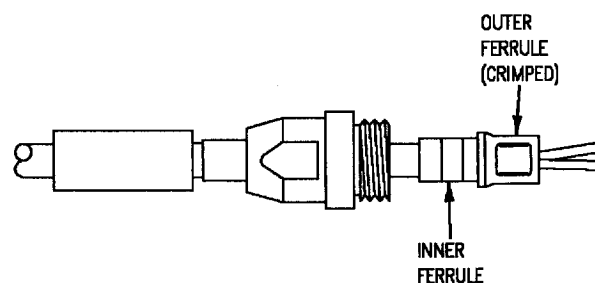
885-213-001 Twinax Assembly Procedure (Sheet 1)
